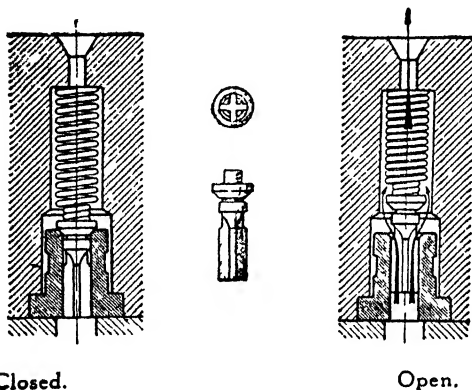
The Bosch Fuel Pump Delivery Valve
